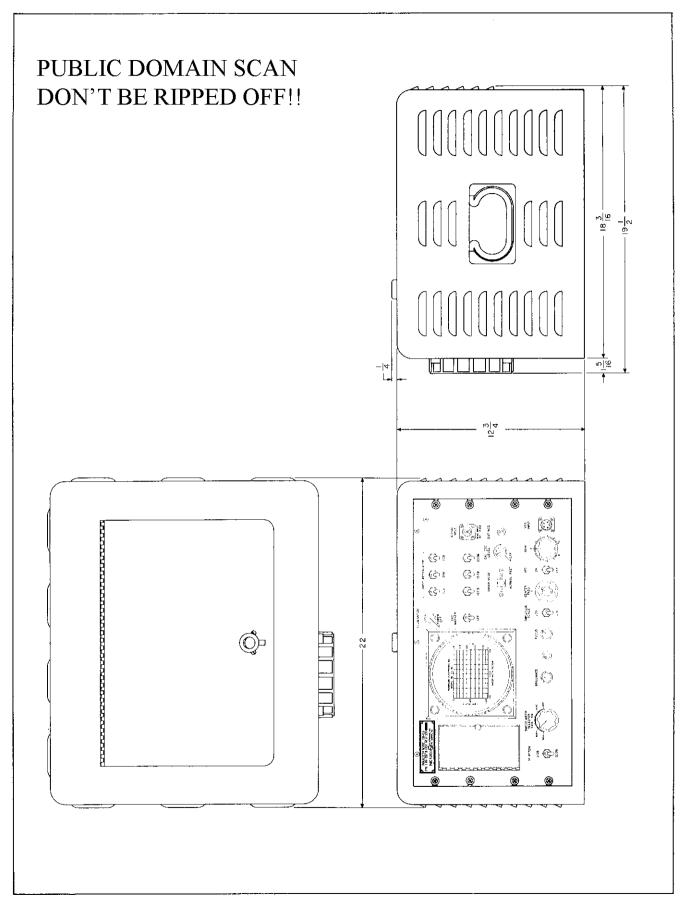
Outline Dimensional Drawing, Model SB-12b in Cabinet.
